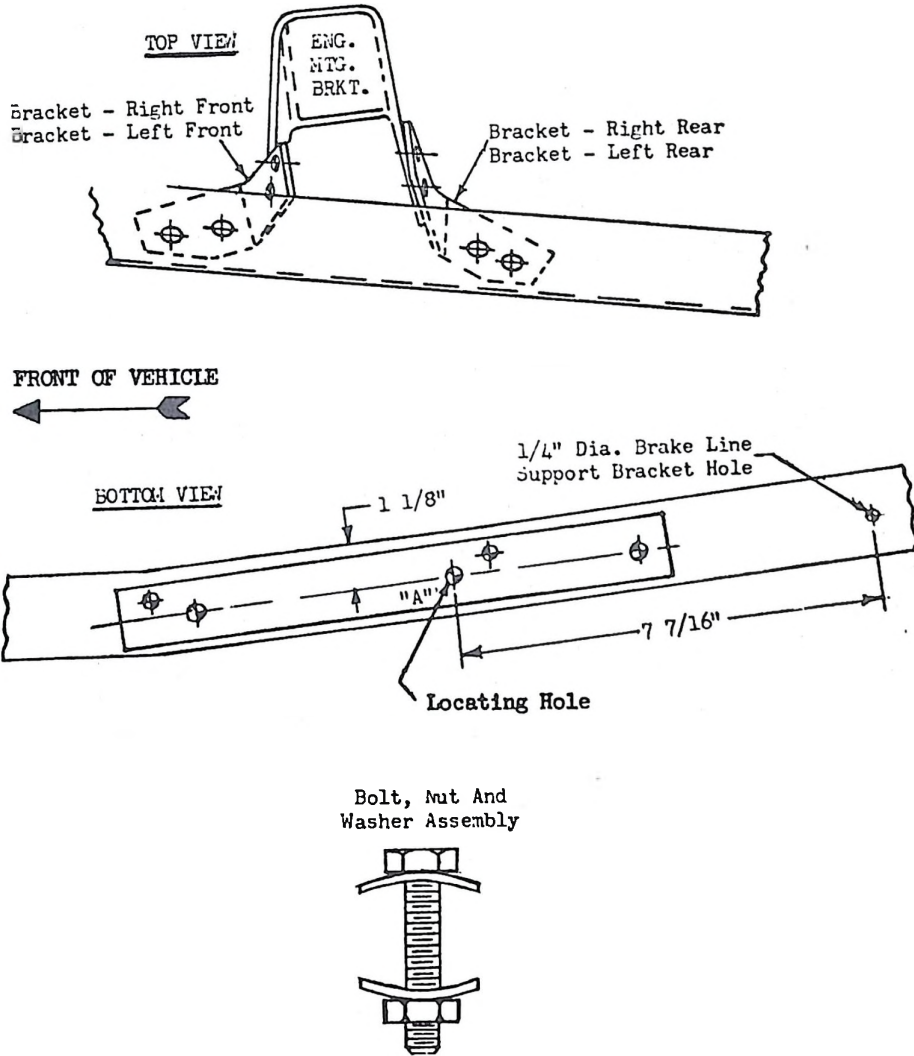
FRAME BRACKET & PLATE PACKAGE INSTALLATION
